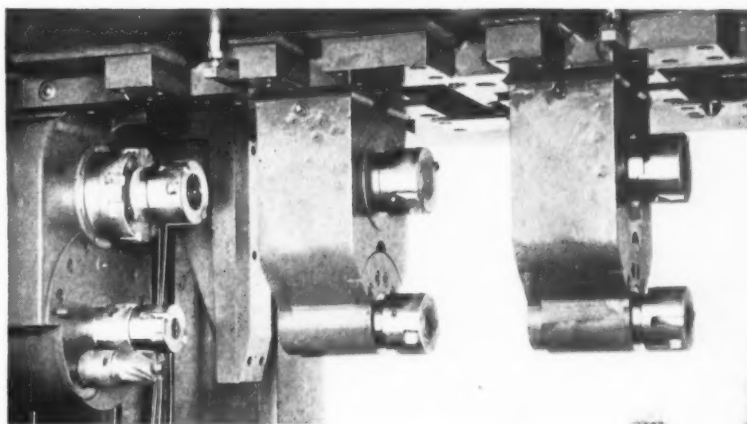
Rough-boring Tools of the Solid Type Tipped with Cemented Carbide, as Mounted in Machine
